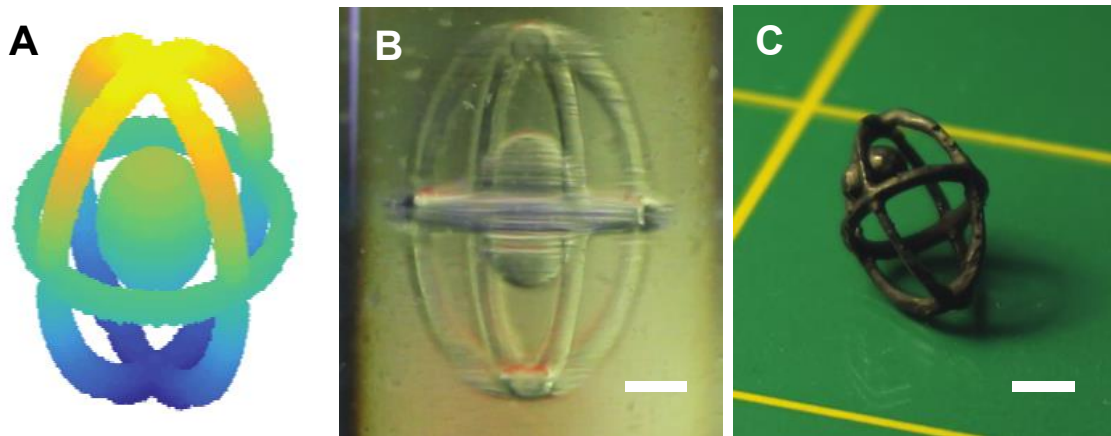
Ball-in-a-cage print. (A) The target 3D geometry. (B) Image of the formed geometry inside the resin vial with no support structures. (C) The printed part after being rinsed, removed, and painted.
